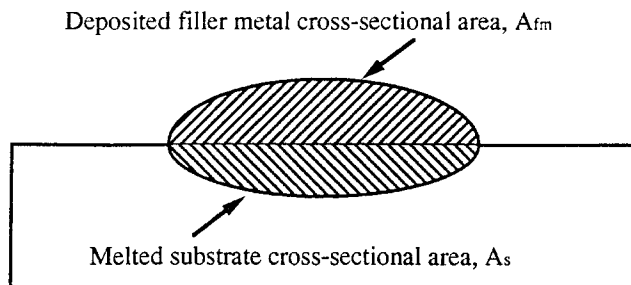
Schematic illustration of dilution in single pass welds.
